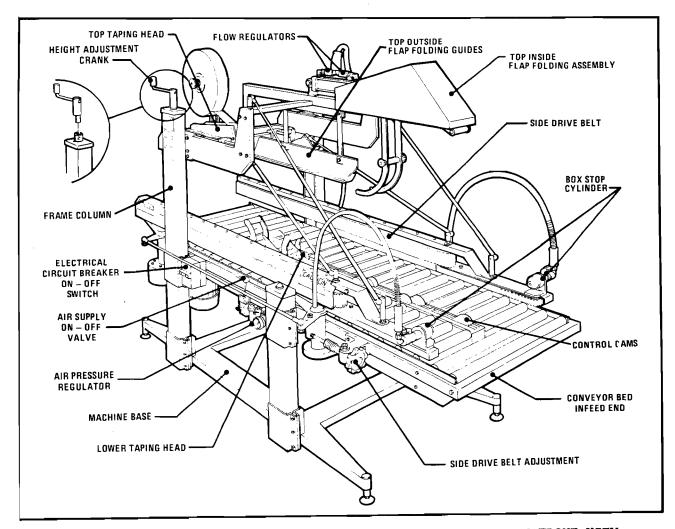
SET-UP INSTRUCTIONS - BOX SEALER COMPONENTS - LEFT FRONT VIEW
